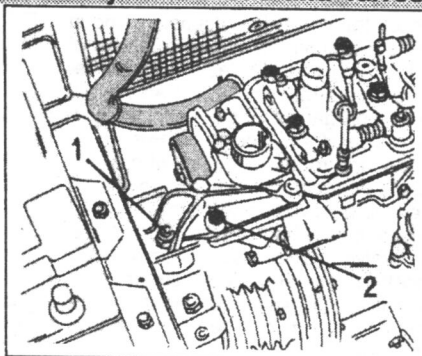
The location of the engine mountings on the R.H. side of the engine.
